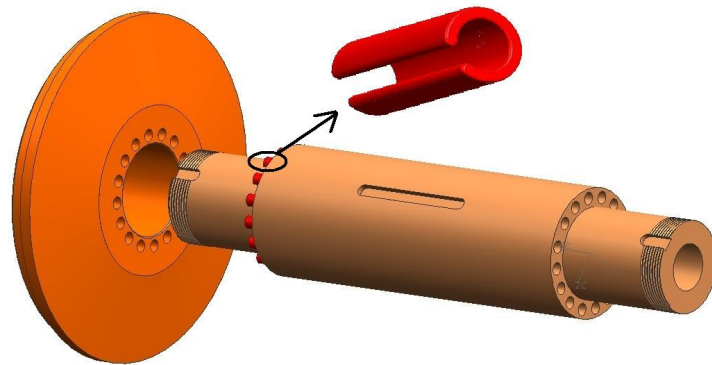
The sheave that has to move onto the intermediate shaft with the spring pins
